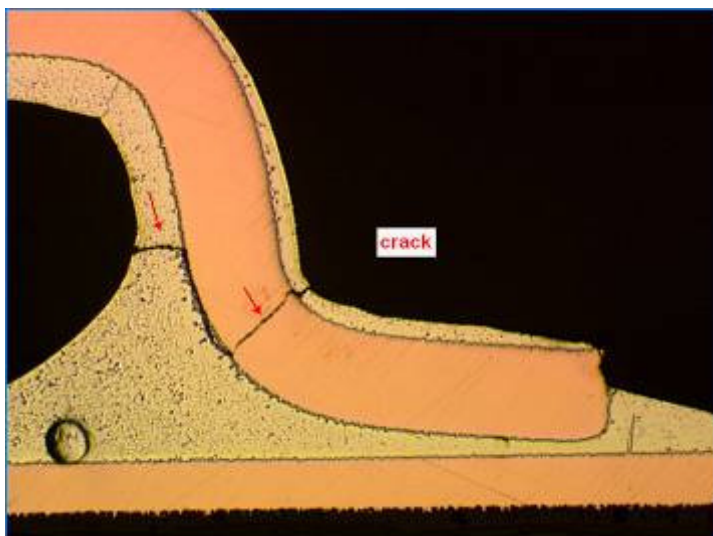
cross section, SN65, U41, right lead and solder crack, 100x
